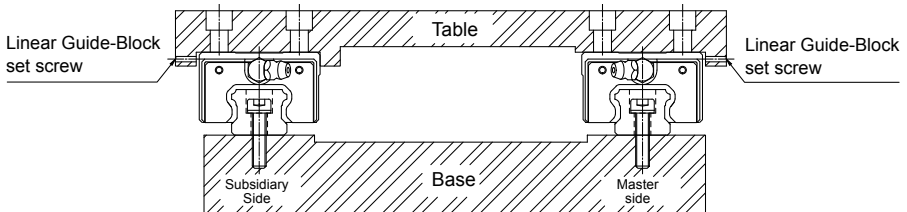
Mounting the Linear Guide without Set Screws on the Master Linear Guide Rail
